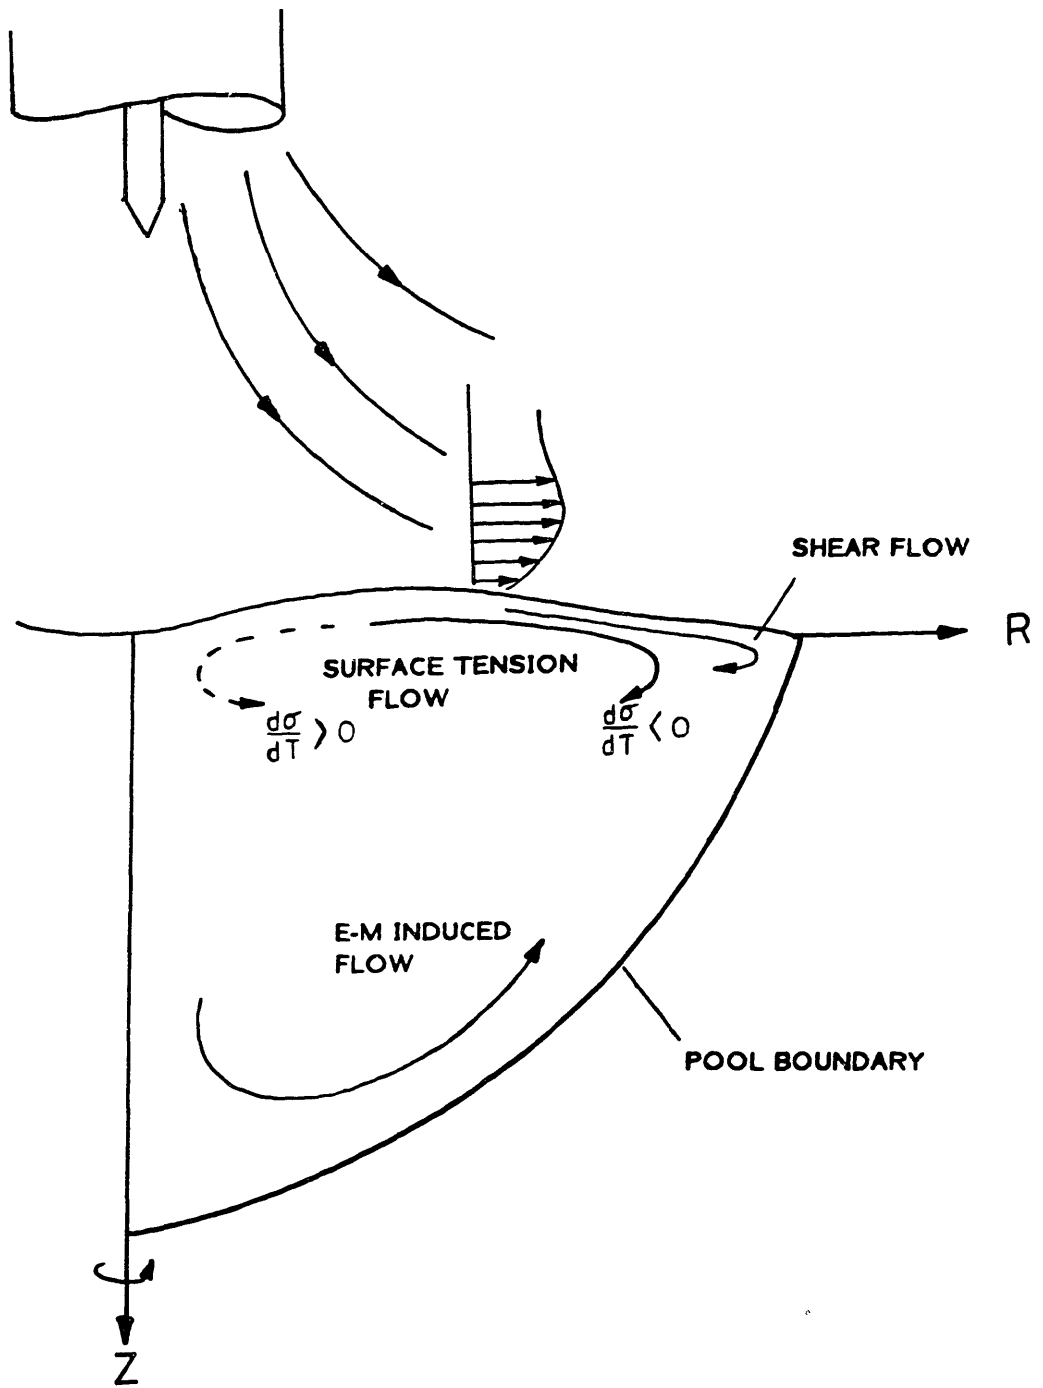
FORCES EFFECTING THE CONVECTION INSIDE THE WELD POOL
